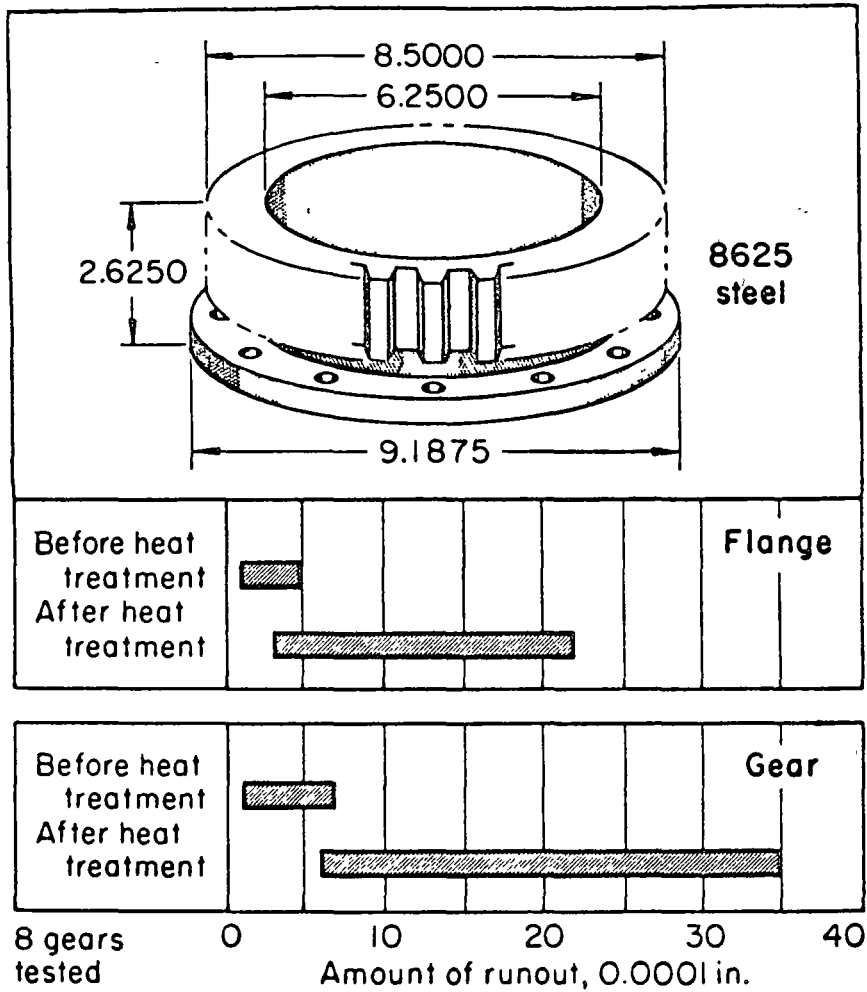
Control range for eight ring gears of 8625 steel that were carburized to a depth of 0.050 in., martempered in oil at 375 F and placed on a plug for cooling to room temperature. Measurements are total indicator readings. (Example 5)
